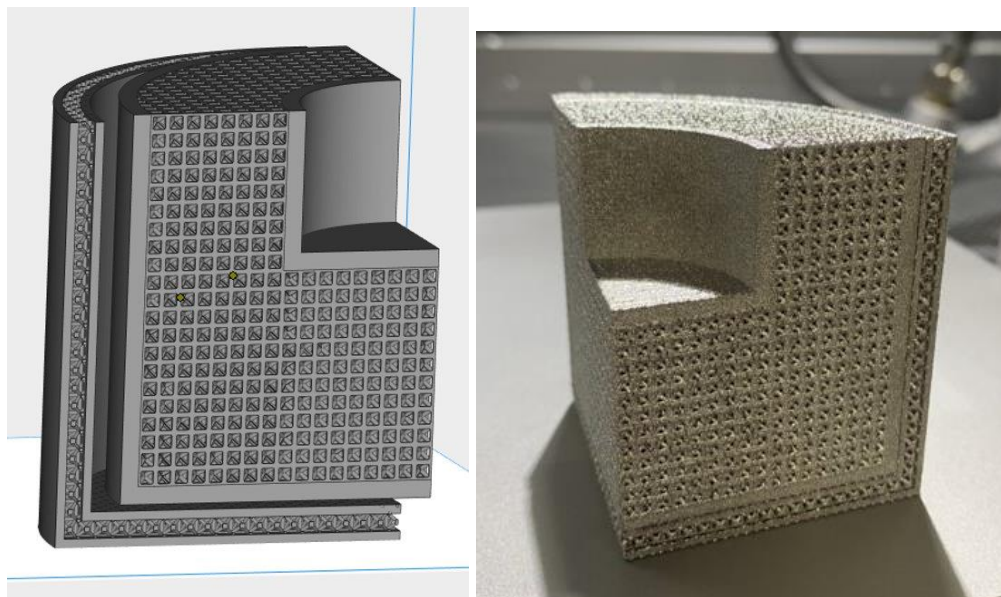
Final 8th Assembly Model (Left) and produced '1/8 cut' model (Right)
